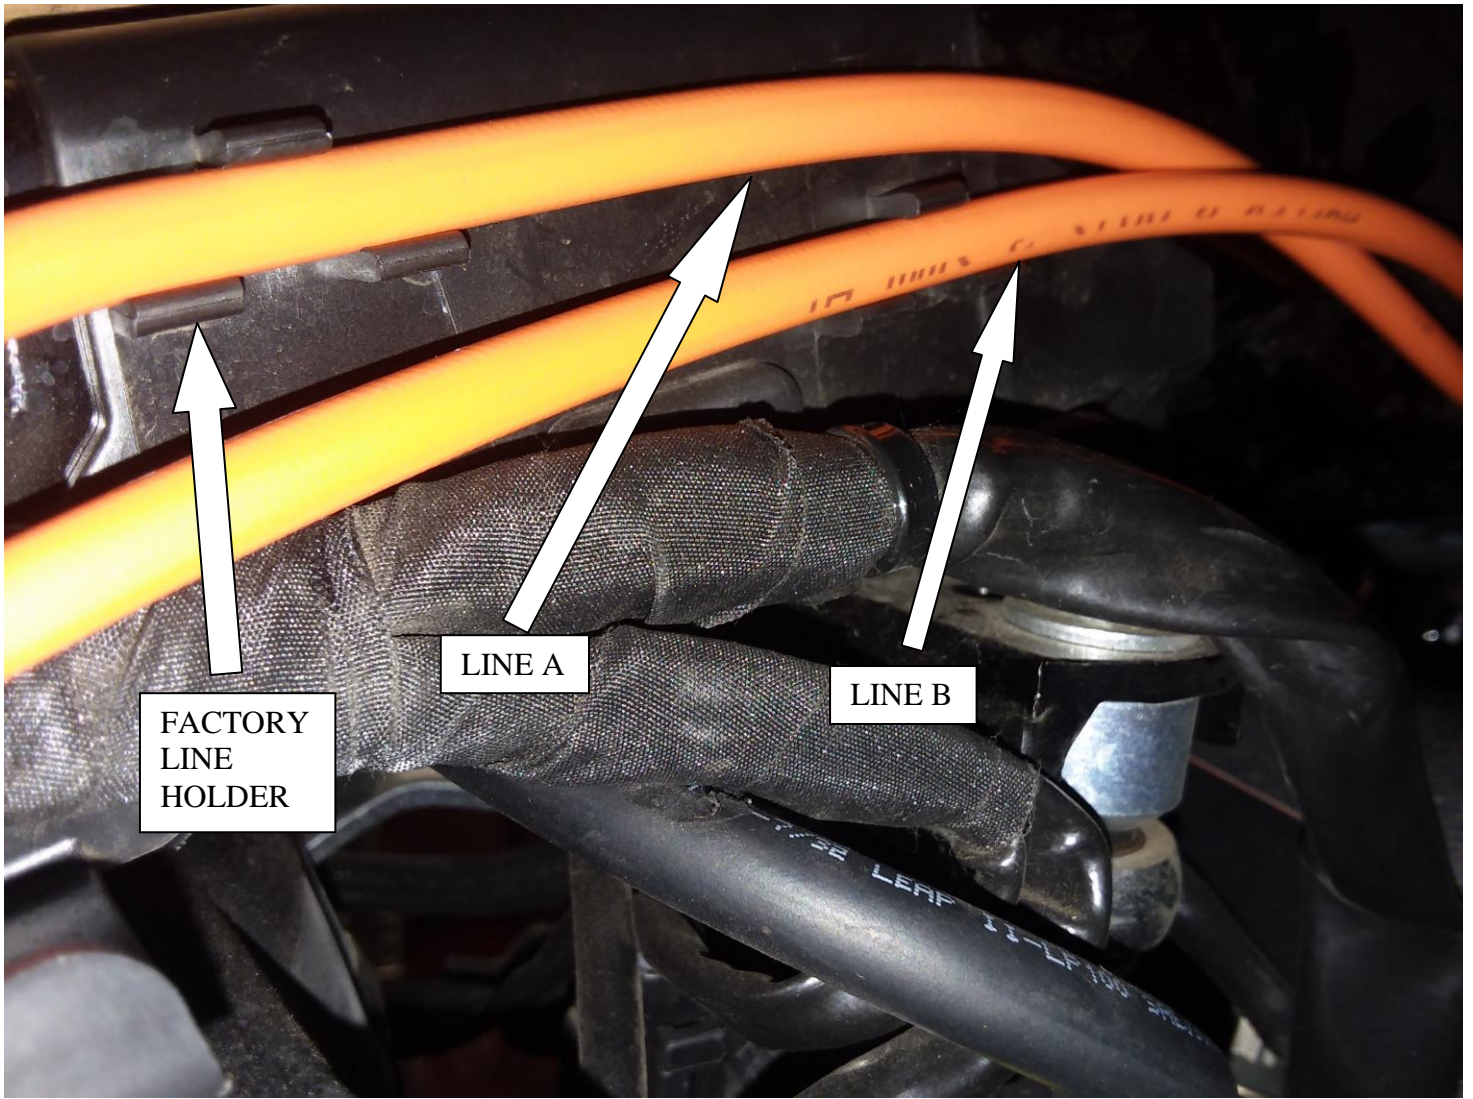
FRONT BRAKE LINE ROUTING
